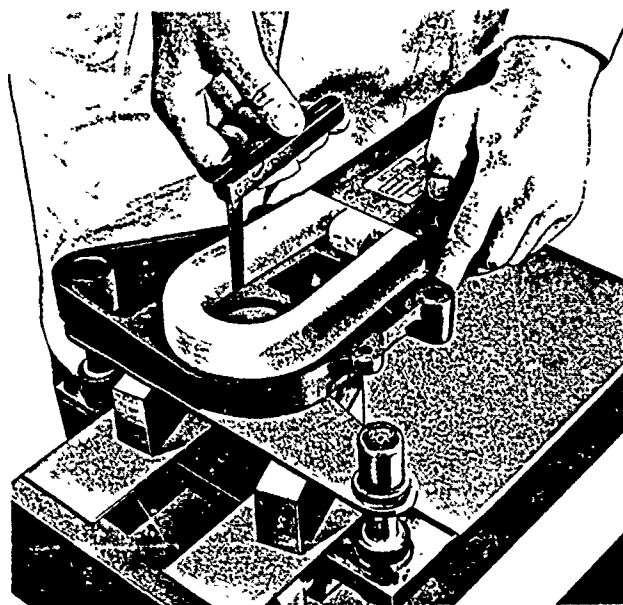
MAINROTORBLADE ATTACHMENT, GAP FOR FILLER
